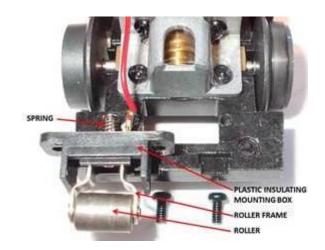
The center pickups telescope up within plastic boxes mounted through square holes in the chassis—at the rear, just behind the gearbox, as shown above; and in front, just ahead of the front axle.
